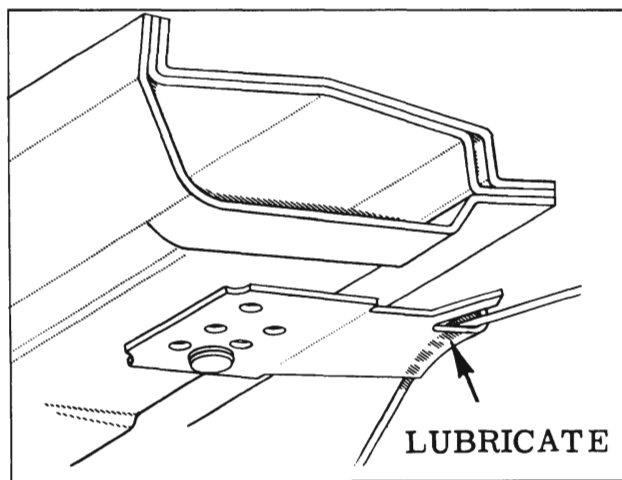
Seat Adjuster Locking Wire Retainer
